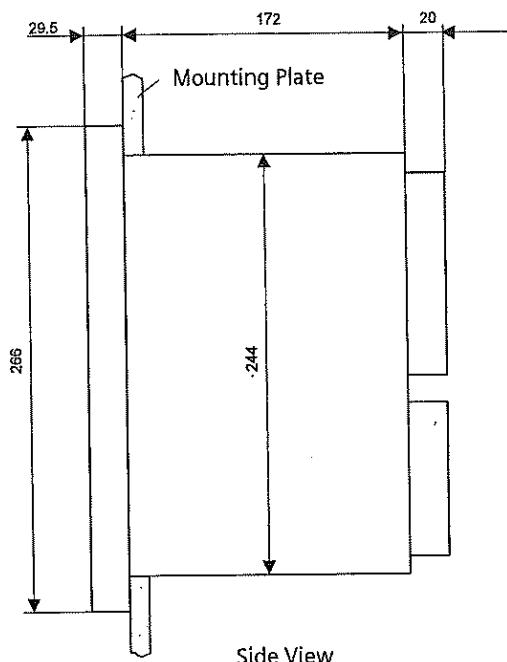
Dimensional drawing of a SIPROTEC 7SJ66 (housing size 1/2)
